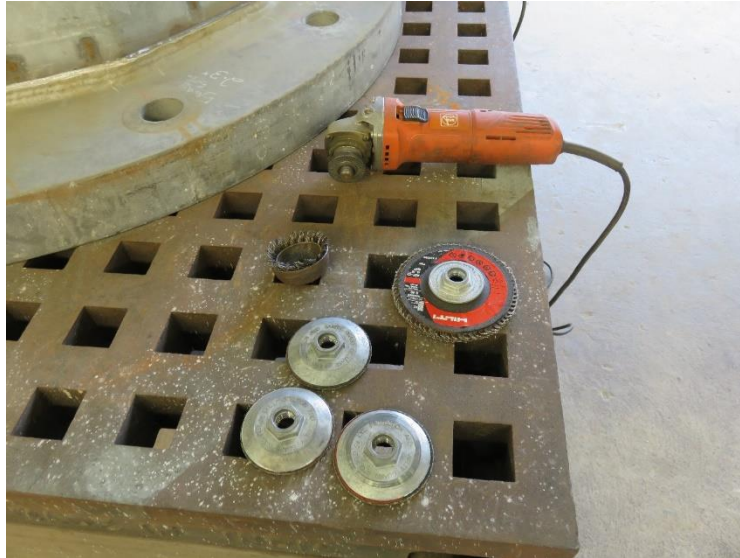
Grinding the Shaft Wall Adjacent to the Weld Toe to Remove Cracks – Grinding Tools
